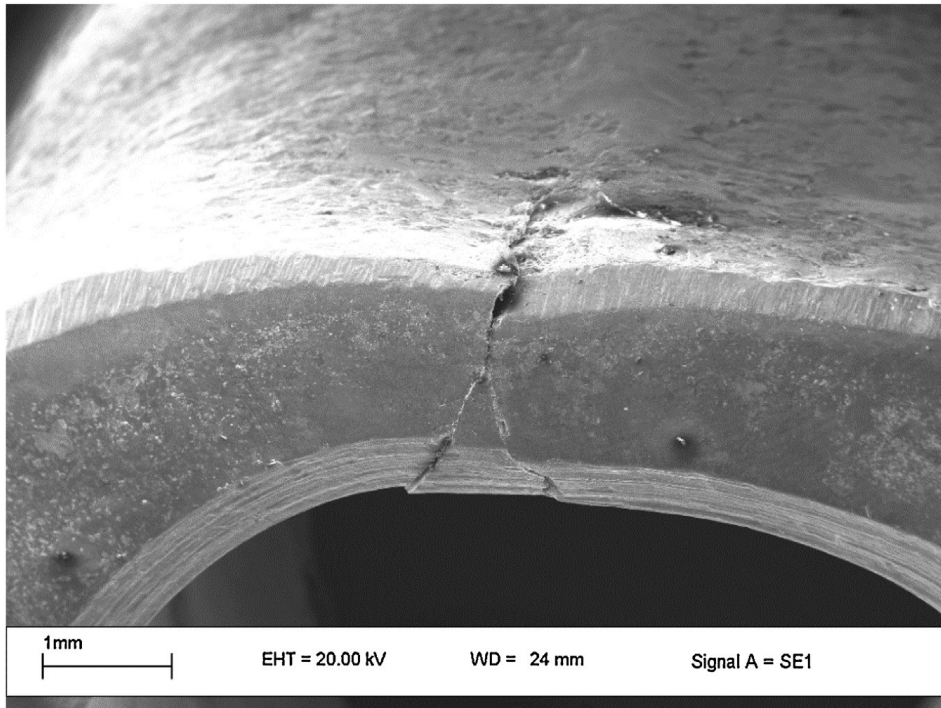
SEM image shows twin cracks in the bolt housing in ENG1 due to bolt defect.
